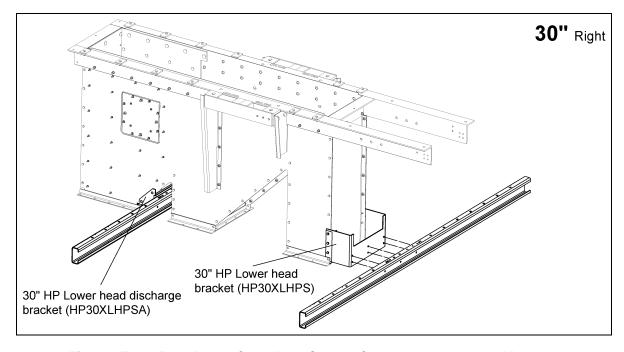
E 30" Right Drive - Cross Deck Support Channels to Lower Head Brackets
